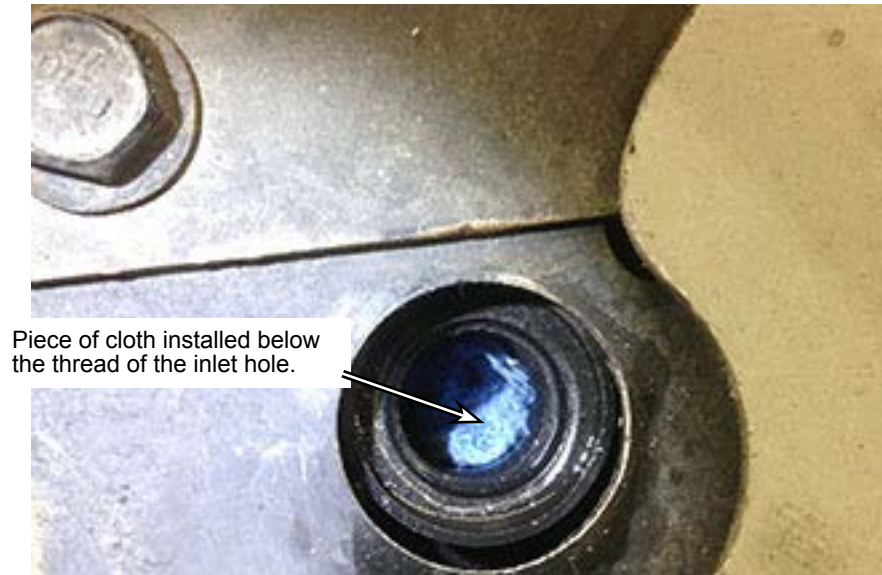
Piece of Cloth Installed in Inlet Hole.
